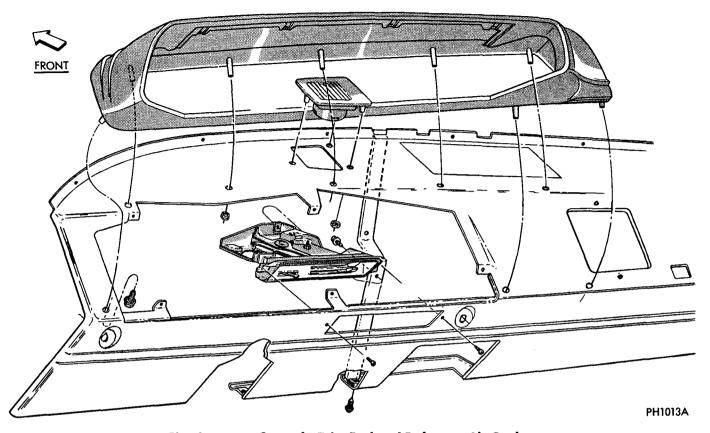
Heater Controls, Trim Pad and Defroster Air Outlets
